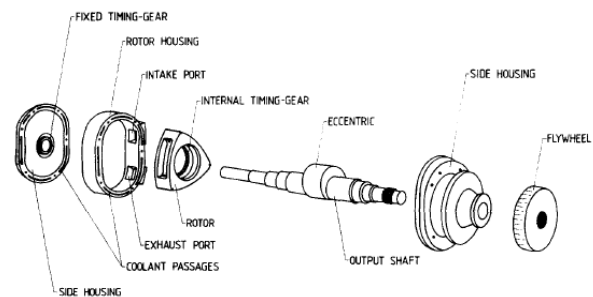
Exploded view of Wankel engine. Note eccentric element on output shaft (Badr et al., 1991).
